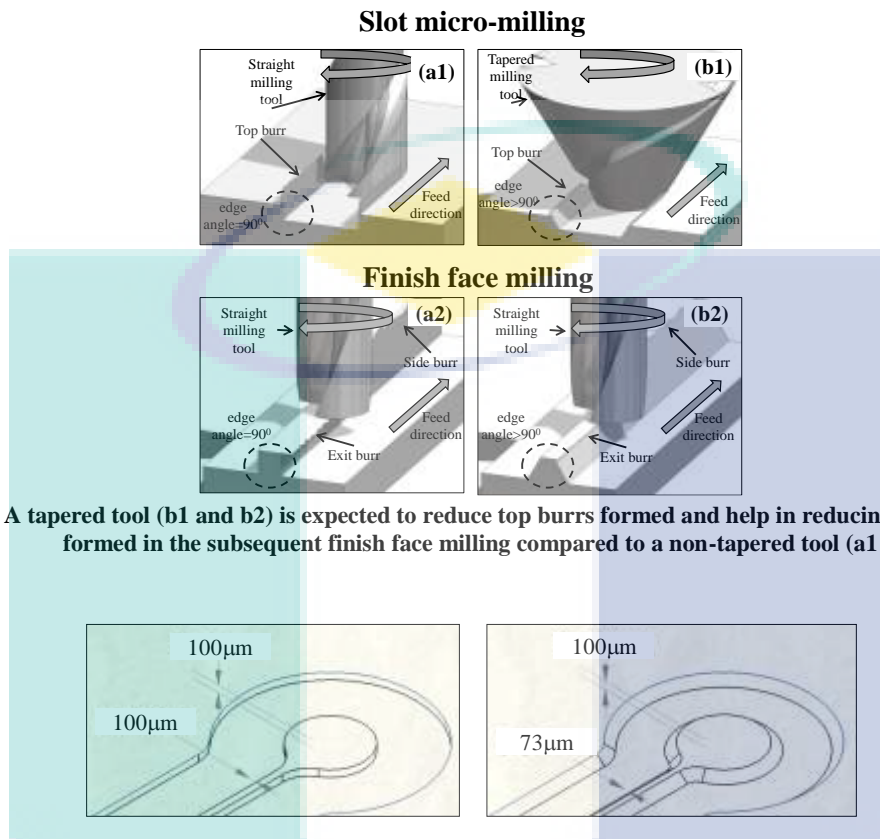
A tapered tool (b1 and b2) is expected to reduce top burrs formed and help in reducing the exit burrs formed in the subsequent finish face milling compared to a non-tapered tool (a1 and a2).
